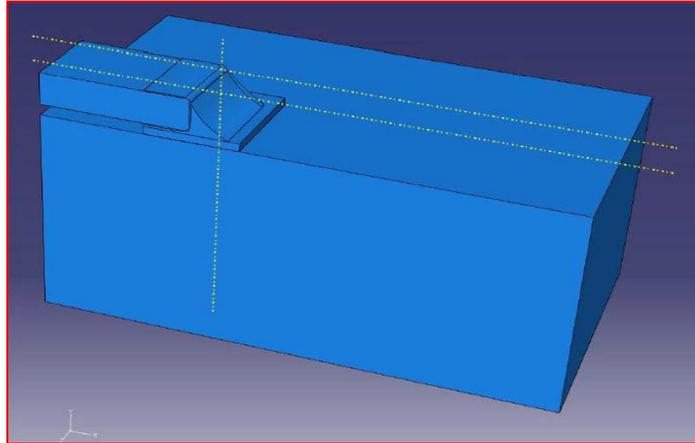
Assembly of Solder with Solder Cap and Ceramic
